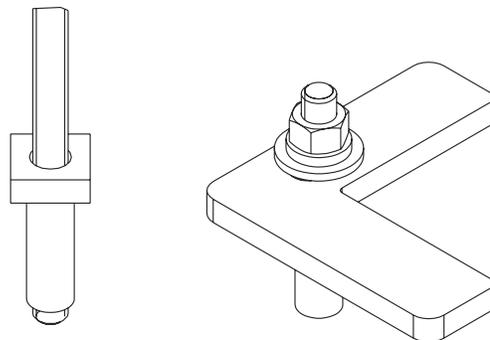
Threaded Rod and Retainer Plate Assembly
